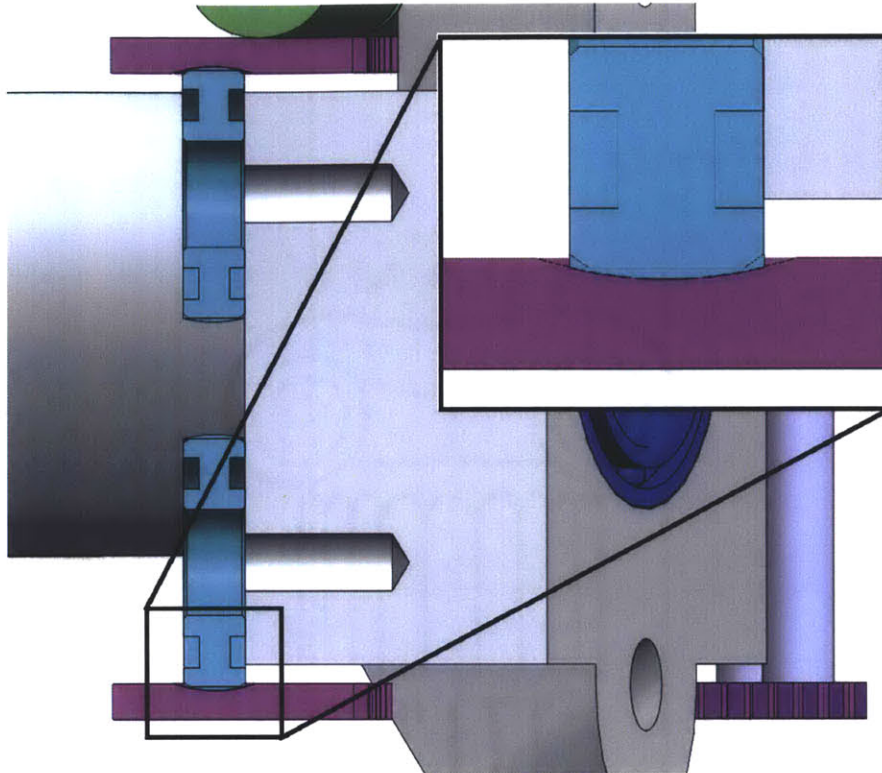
A detailed view of a support bearing in its trough. The radii of the surfaces can be adjusted to minimize rubbing.
